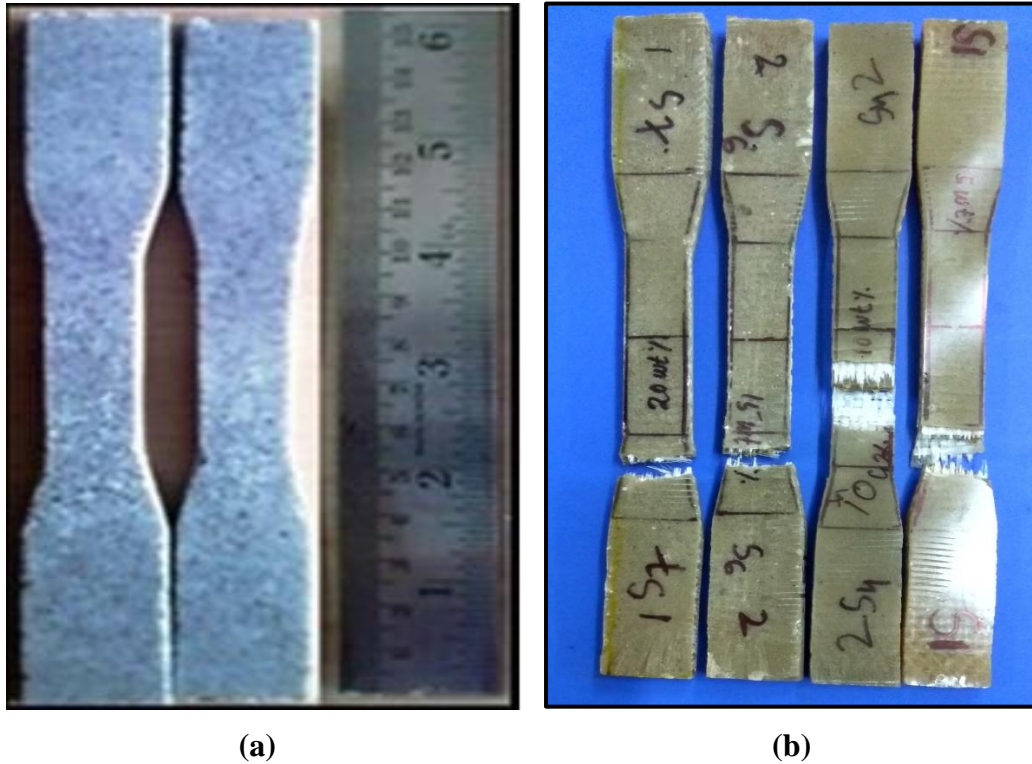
Photograph of (a) Specimen for testing (b) Tensile fractured samples
